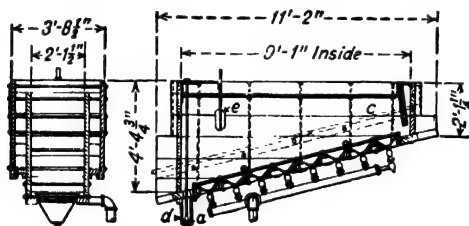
Callow-pneumatic machine. (*The General Engineering Co.*)
